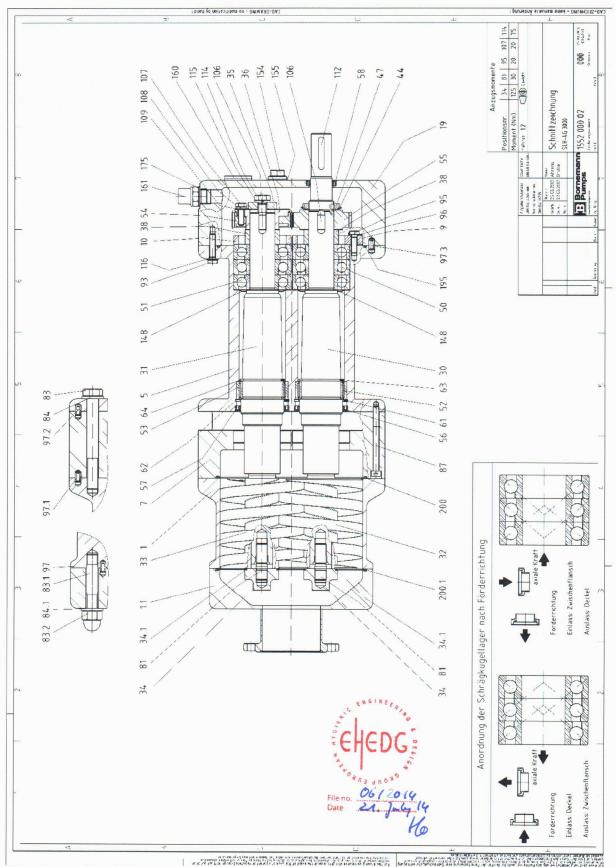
sectional drawing of Twin Screw pumps series SLH-4G with EPDM gaskets and Huhnseal ESH/EDH mechanical seal, here example size 3000
